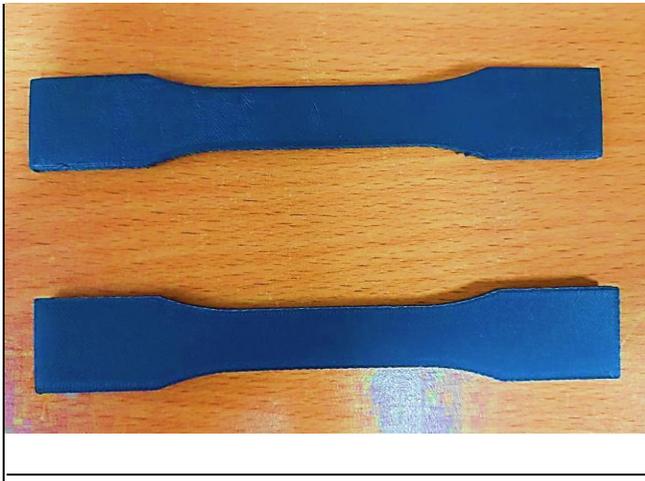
Photograph of Tensile test specimen fabricated as per ASTM D638 standard
